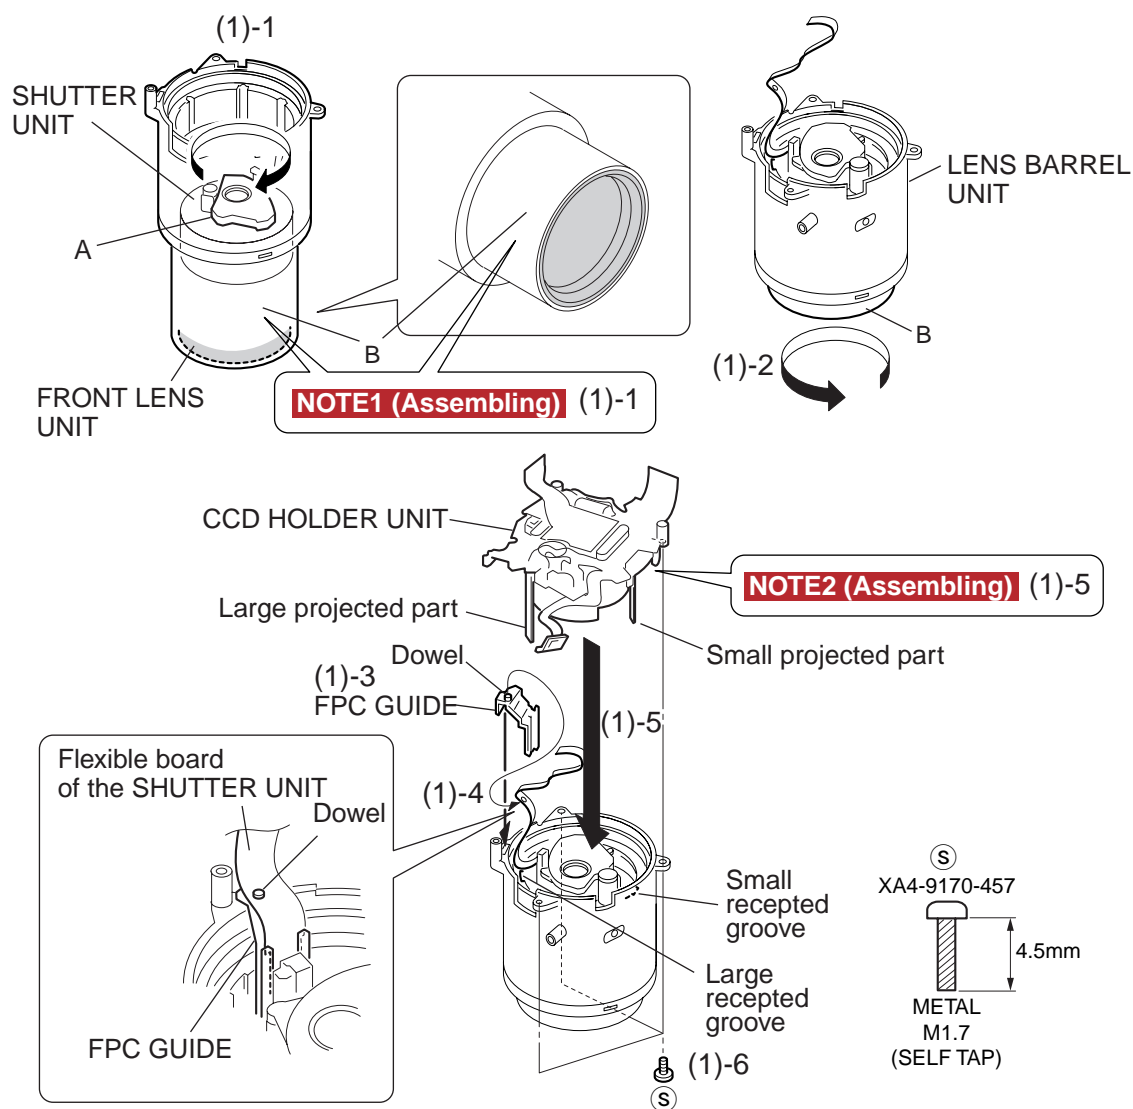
Assembling the CCD HOLDER,SHUTTER UNIT-2
